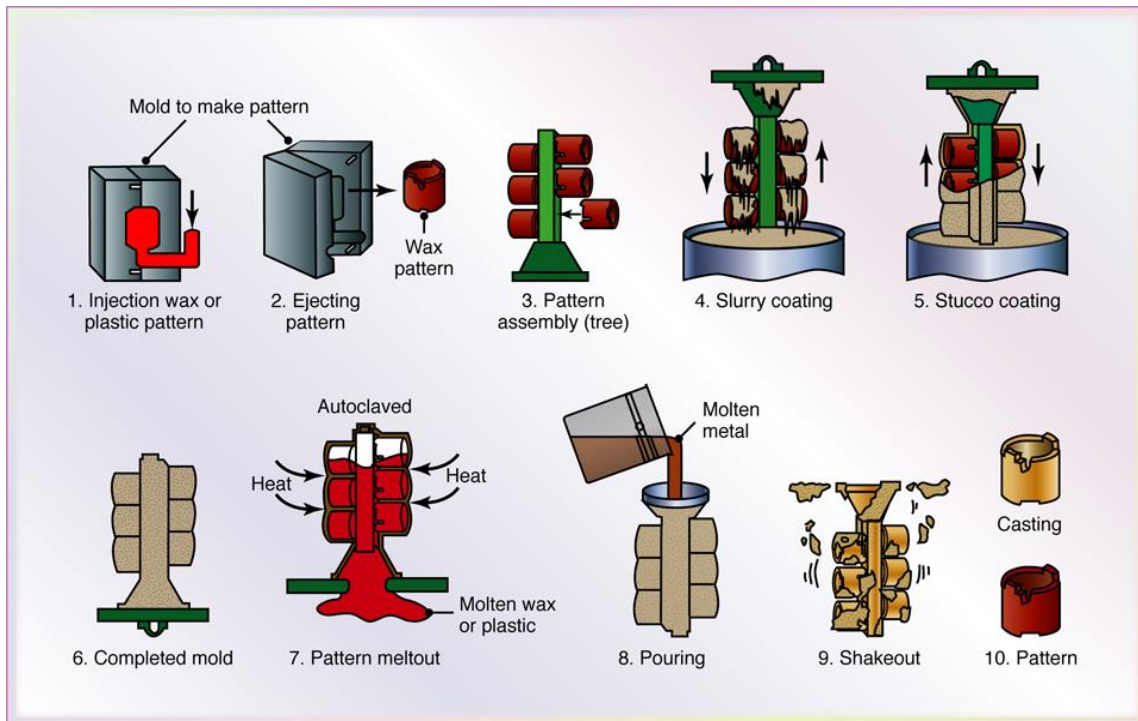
Schematic Illustration of Investment Casting (Lost-Wax) Process
